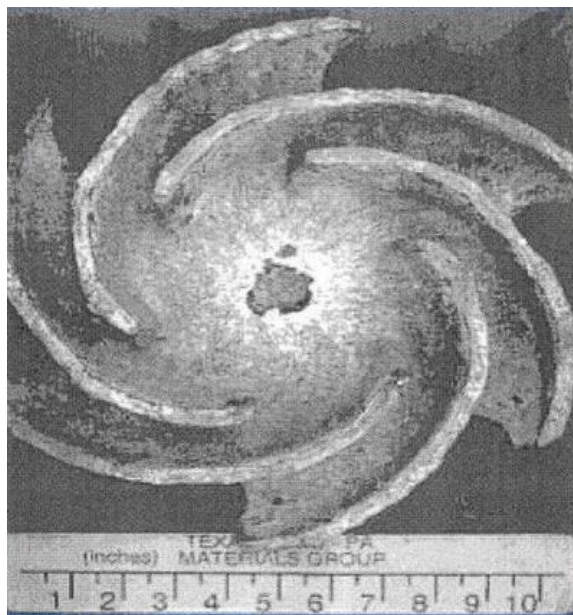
Erosion-corrosion of a cast stainless steel pump impeller after exposure to hot concentrated sulfuric acid with some solids present. Note the grooves, gullies, waves, and valleys common to erosion-corrosion damage [11].
